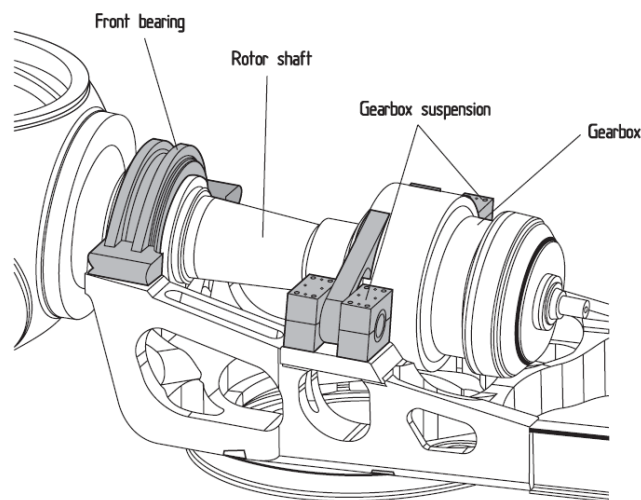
Rotor Shaft – Gearbox assembly, the hub at the very beginning. [10]
